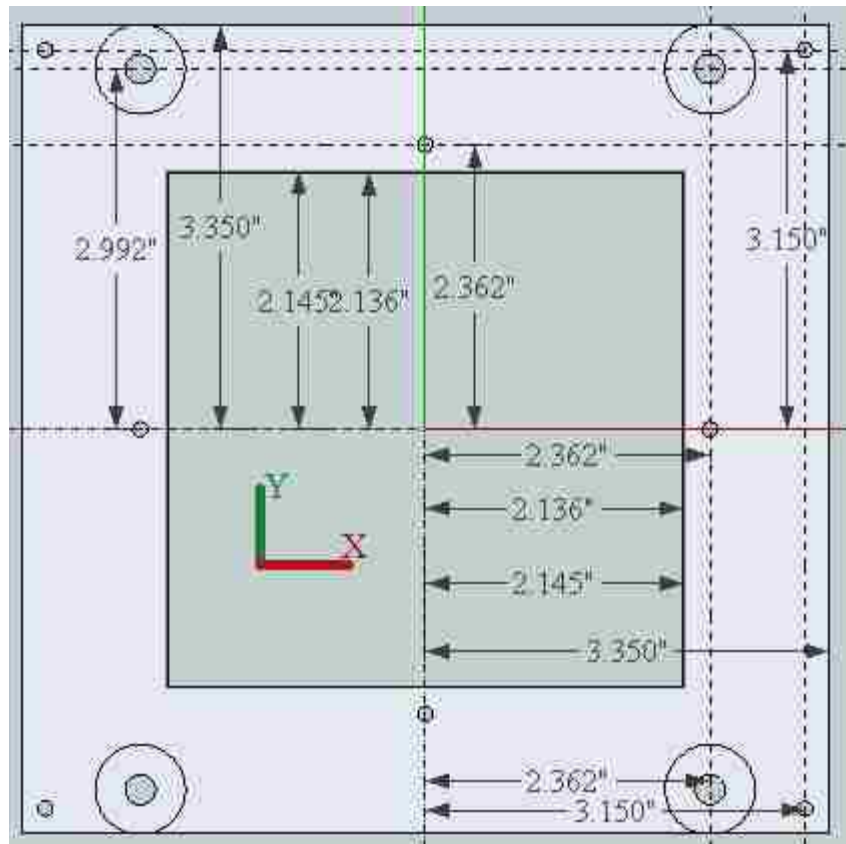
Top view of the 10x10 cm² middle trimmer aluminum plate illustrating the in-plane and cross-plane dimensions. The middle trimmer is square, such that all non-hole dimensions are equal in the in-plane and cross-plane dimensions.
